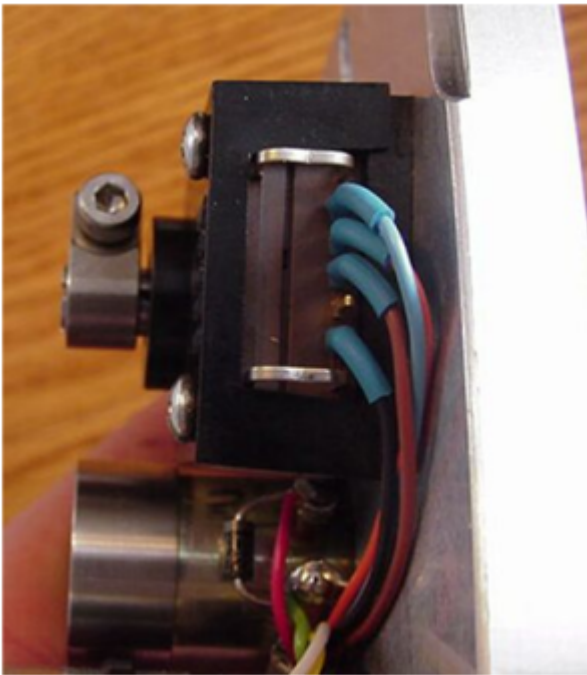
loosen clamp wrench to on motor drive near encoder and remove 1st drive shaft
